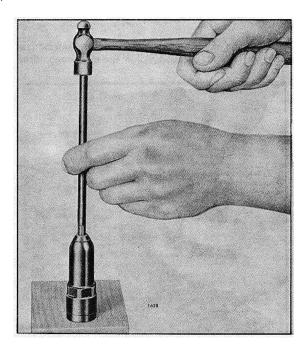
Removing Spray Tip from Injector Nut using Tool J 129102
